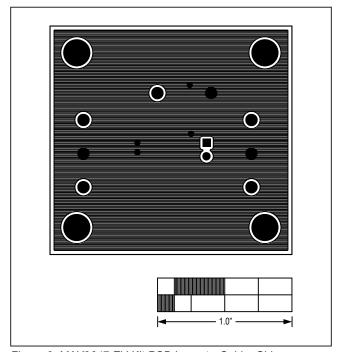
MAX9647 EV Kit PCB Layout—Solder Side
